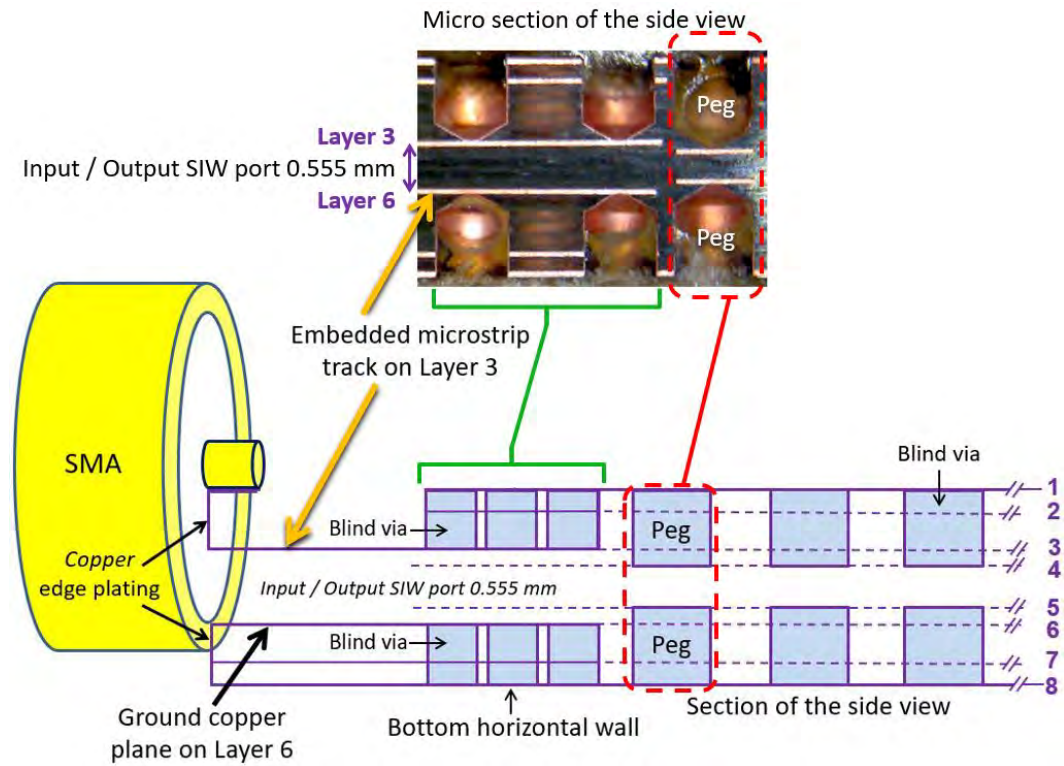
Stack-up for the multilayer PCB with a SMA edge mount connector to an UWB SIW transition.
